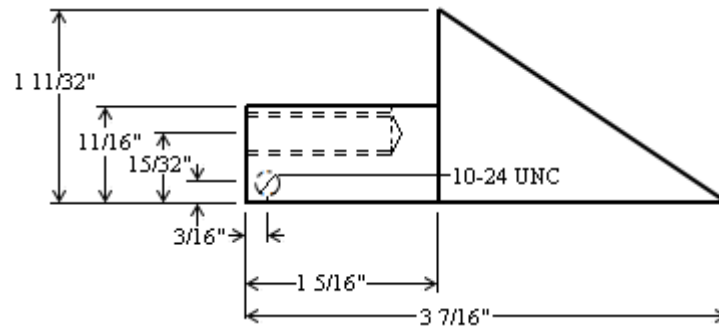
Side view Hook-SH6 (dimensions in inches).
